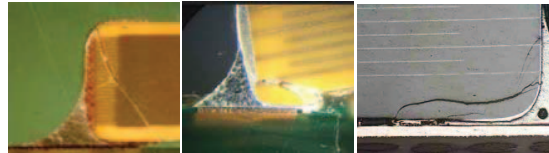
Cracks of multi-layer ceramic capacitors, due to vibration/mechanical stress, flex of printed circuit board assembly etc. [17],[6],[18]
